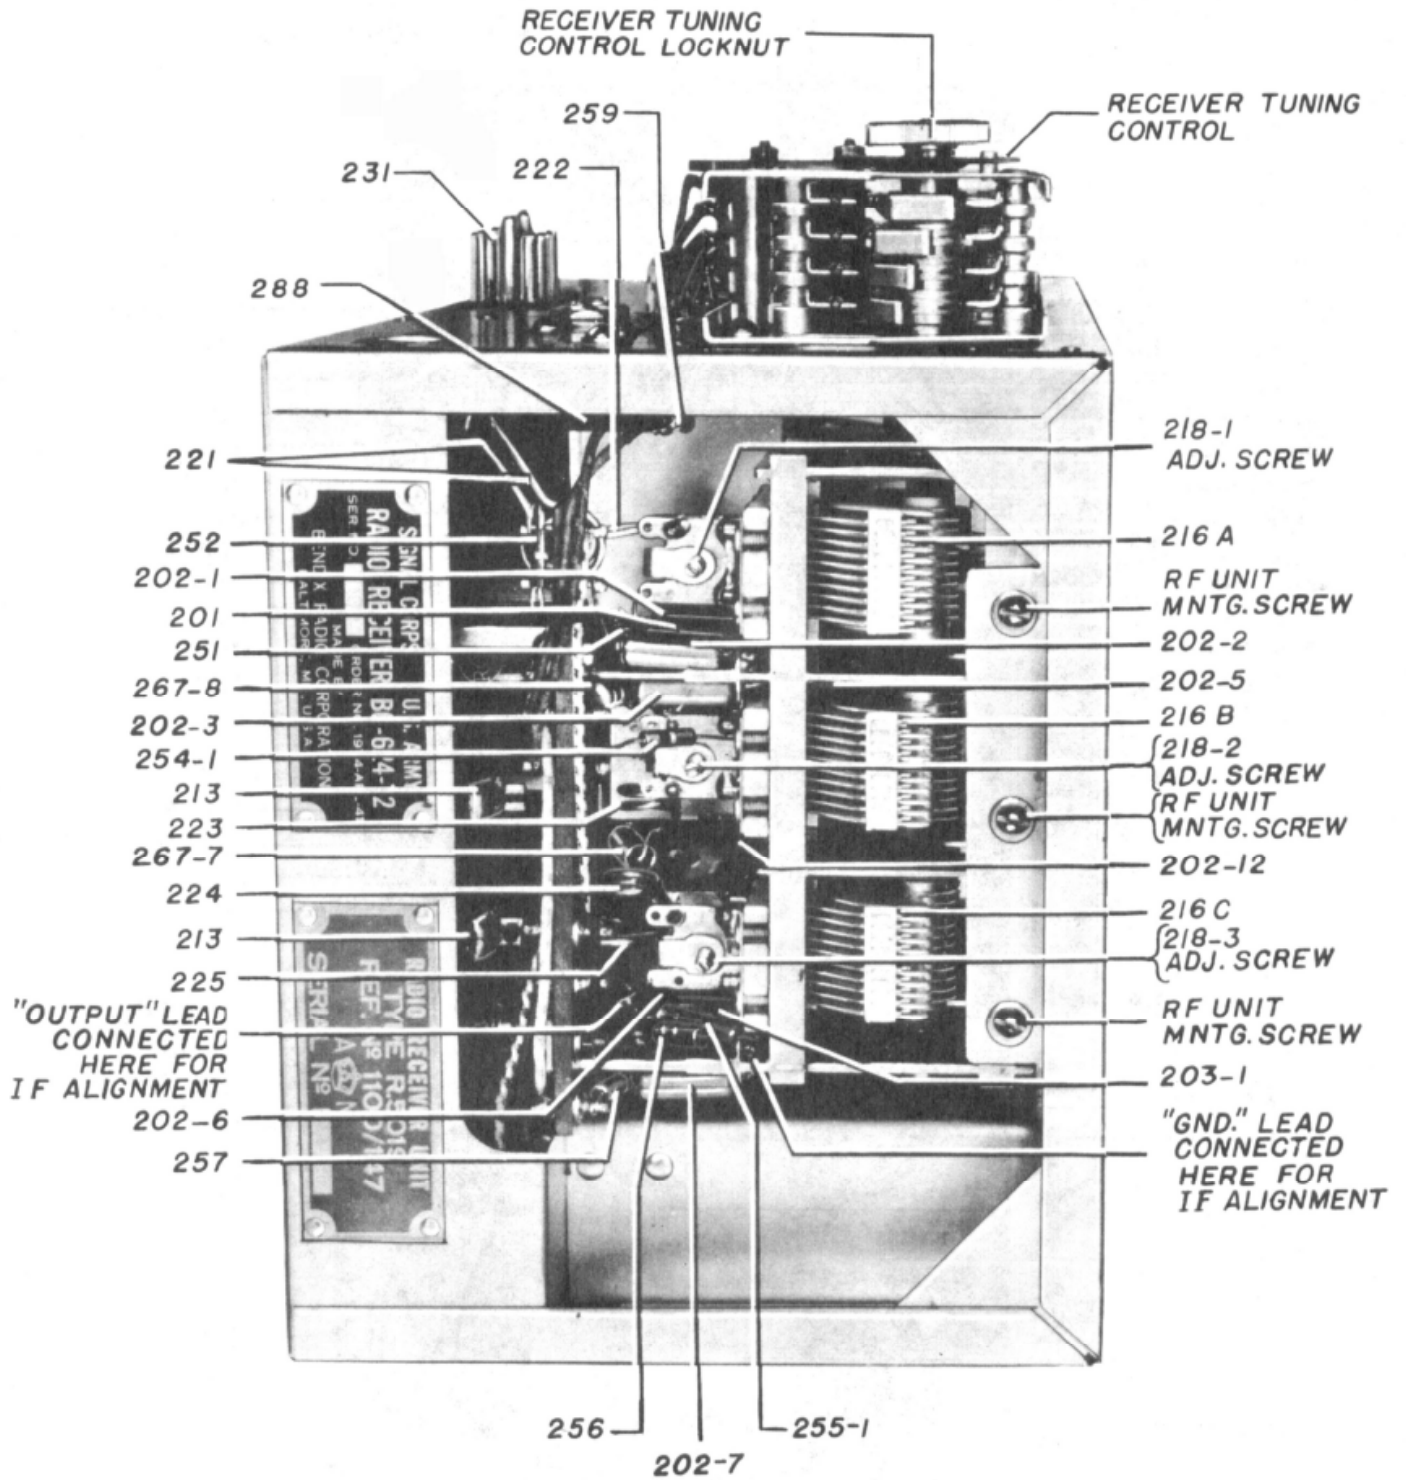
RADIO RECEIVER BC-624-A, RIGHT SIDE VIEW
